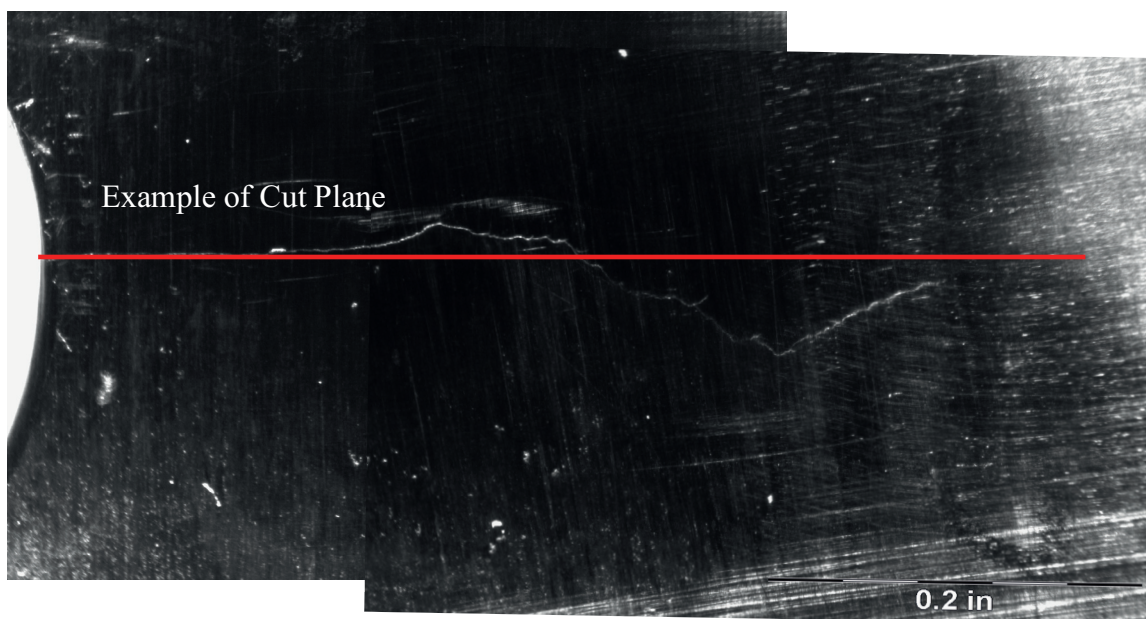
Image of Coupon Cx4N1-08-D Showing the Nonplanar Surface Crack Tip Morphology with Representation of Wire EDM Cut Line.
